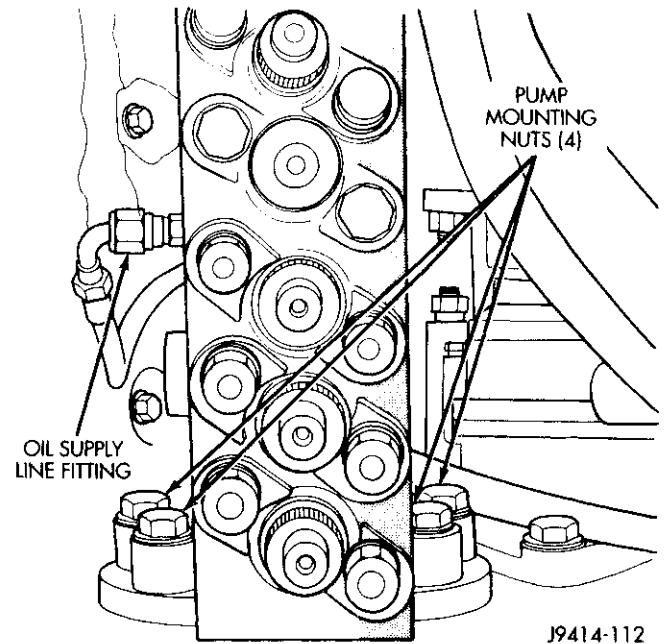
Engine Oil Supply Line—Pump Mounting Nuts
